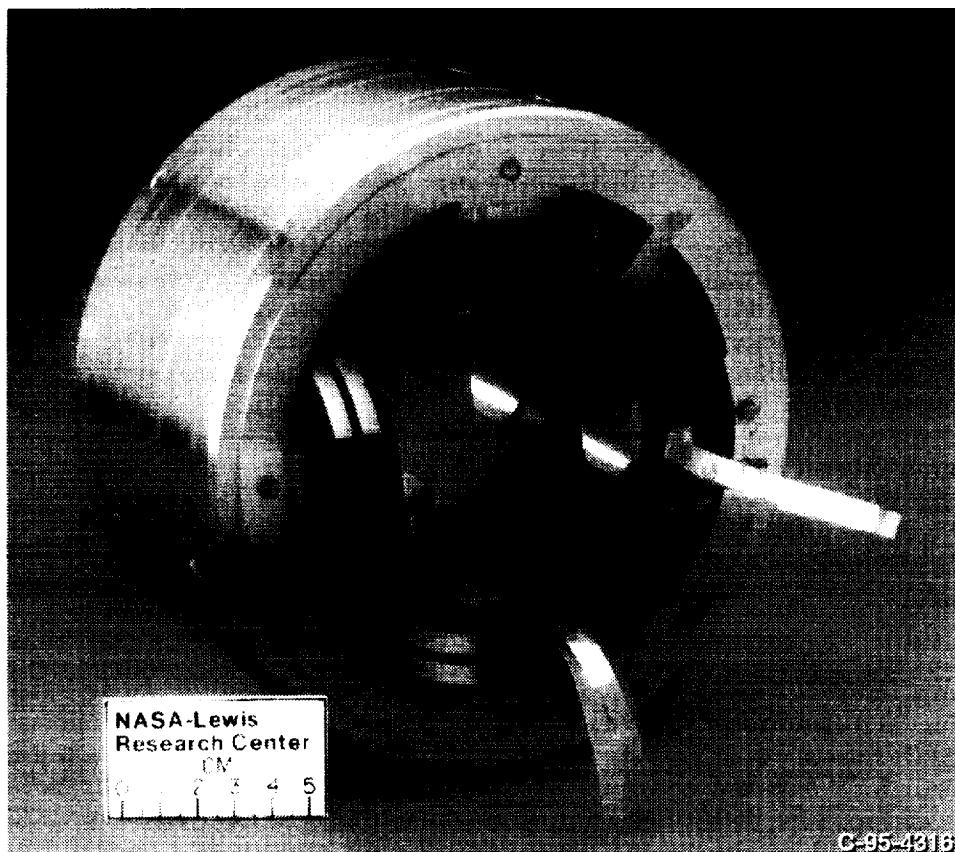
Stator assembly of high-temperature superconducting magnetic bearing.
